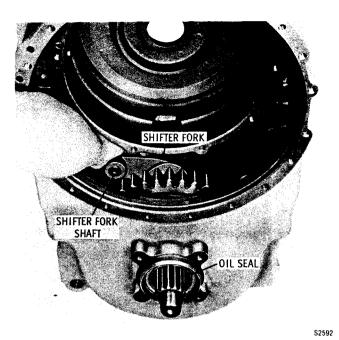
Installing disconnect shifter fork and shaft (-1 models with two-piece output shaft)
